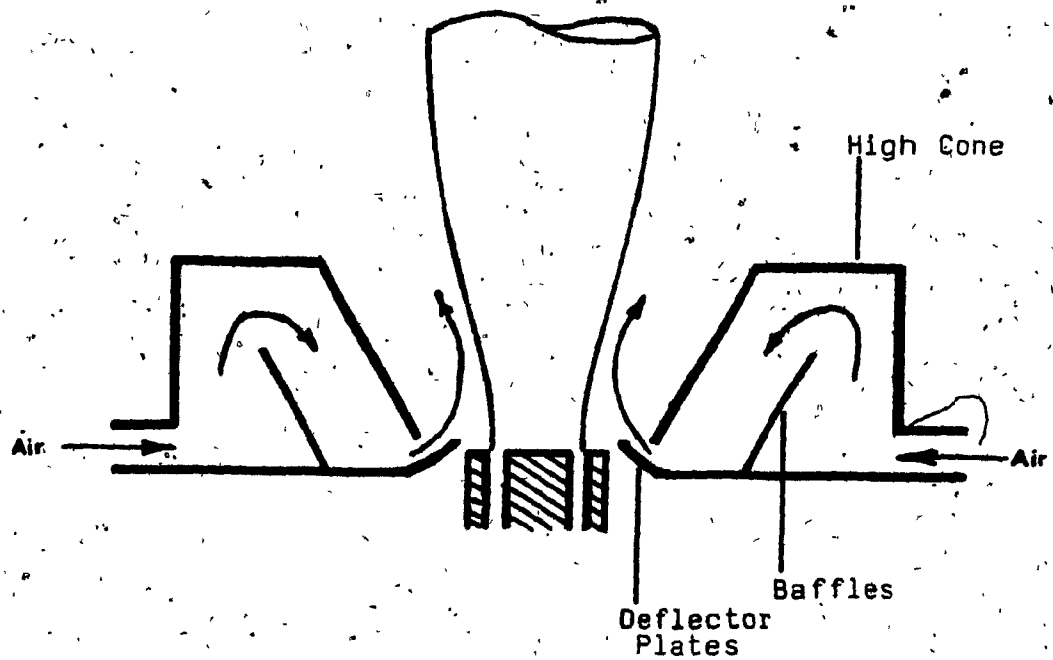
Cutaway View of a High Cone Air Ring
